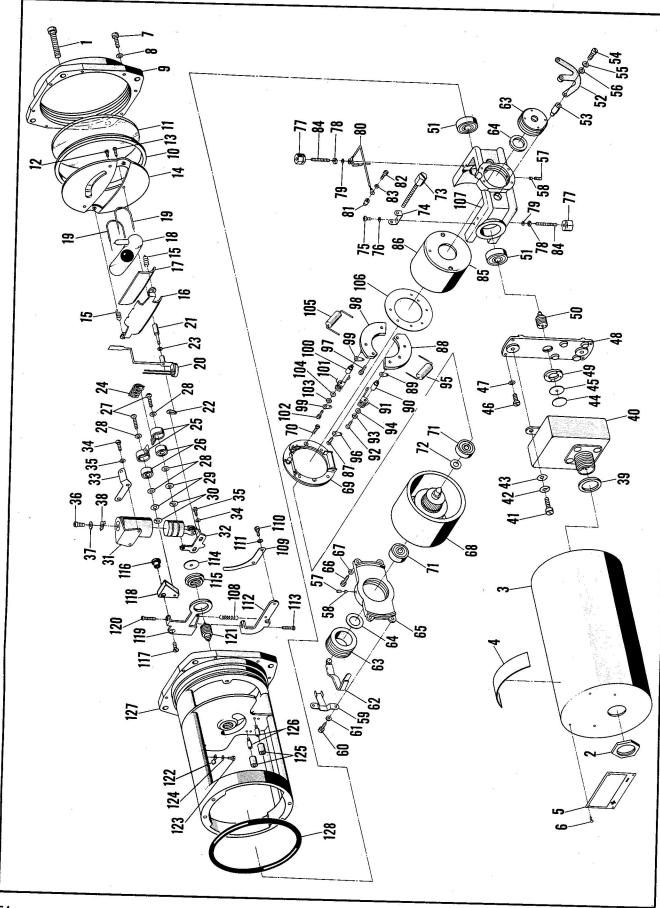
Bank and Turn Indicator Assembly, Model B4B-K
